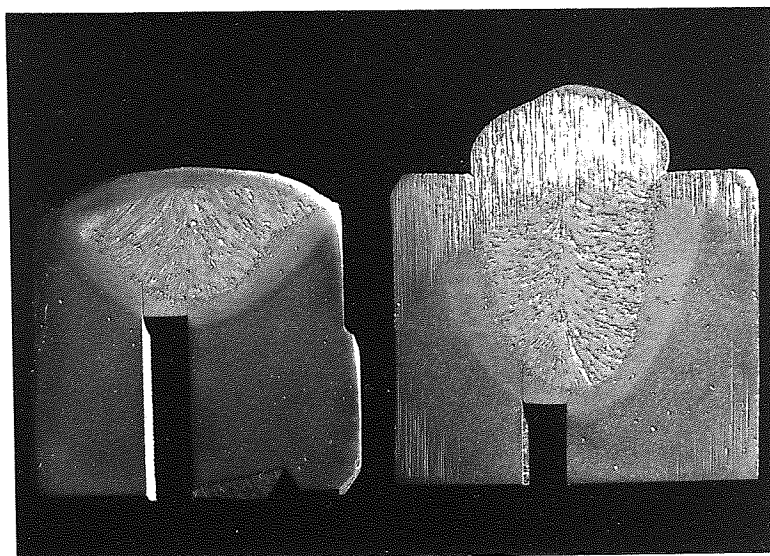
Test pieces welded at 3.6 and 5.6KJ/MM which provided adequate measurement for the weld thermal cycles.
